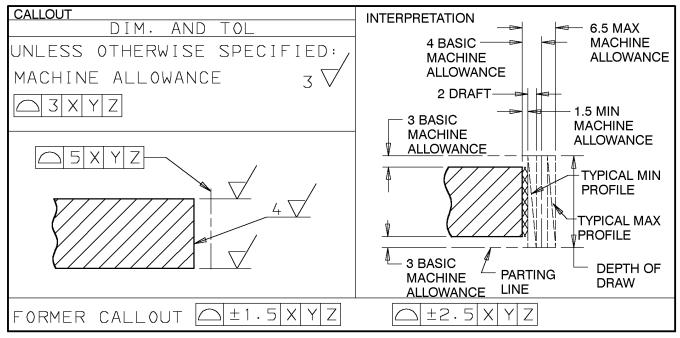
Machine Allowance - Drafted Surface - Edge Parted - Casting
